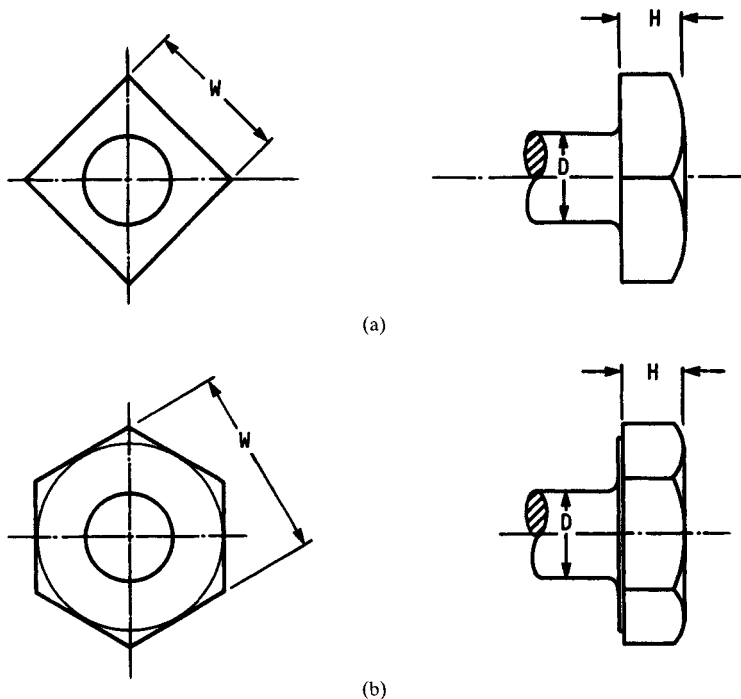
Bolt heads. (a) Square; (b) hex; the washer or bearing face is used only on heavy hex structural bolts.
